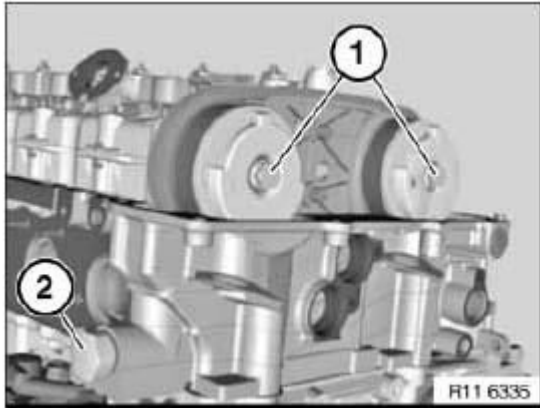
Identifying Engine Central Bolt And Chain Tensioner
